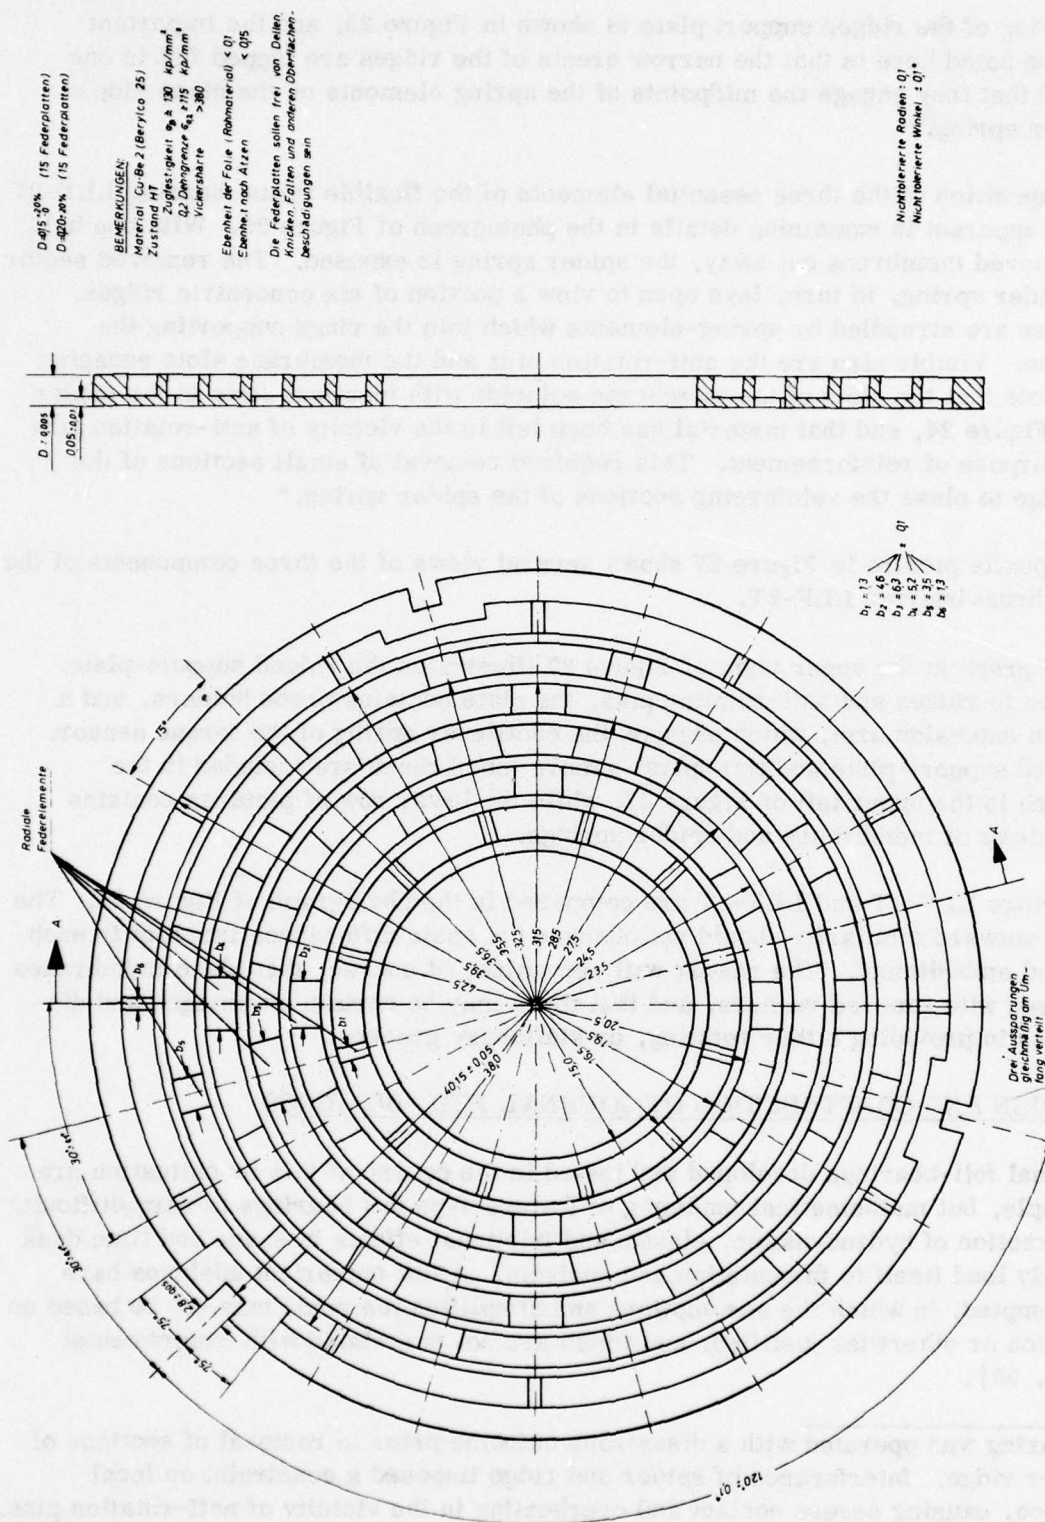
SPIDER SPRING OF FLEXIBLE THRUST BEARING LLF-2T
